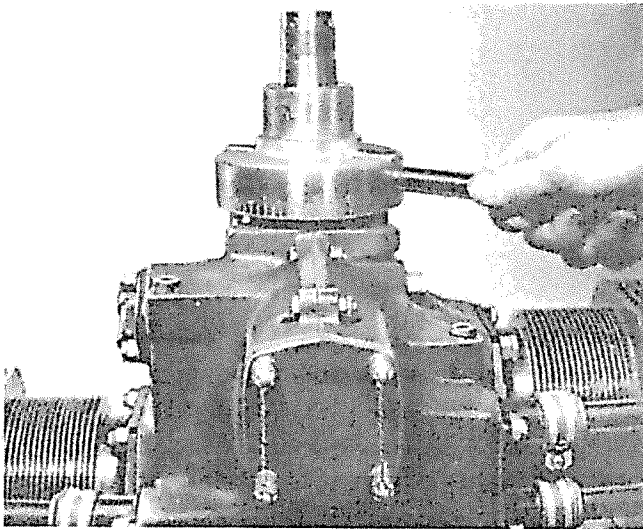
Placing Crankshaft in Firing Positions of No. 1 Piston.
